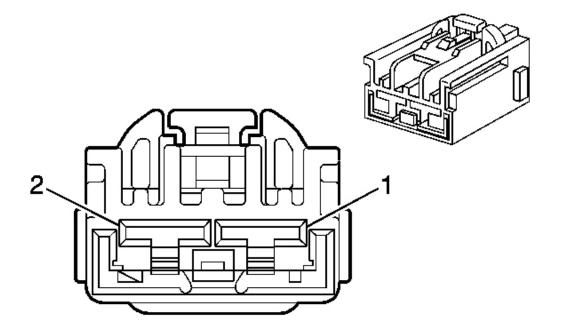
Blower Motor Connector End View Courtesy of GENERAL MOTORS CORP.
